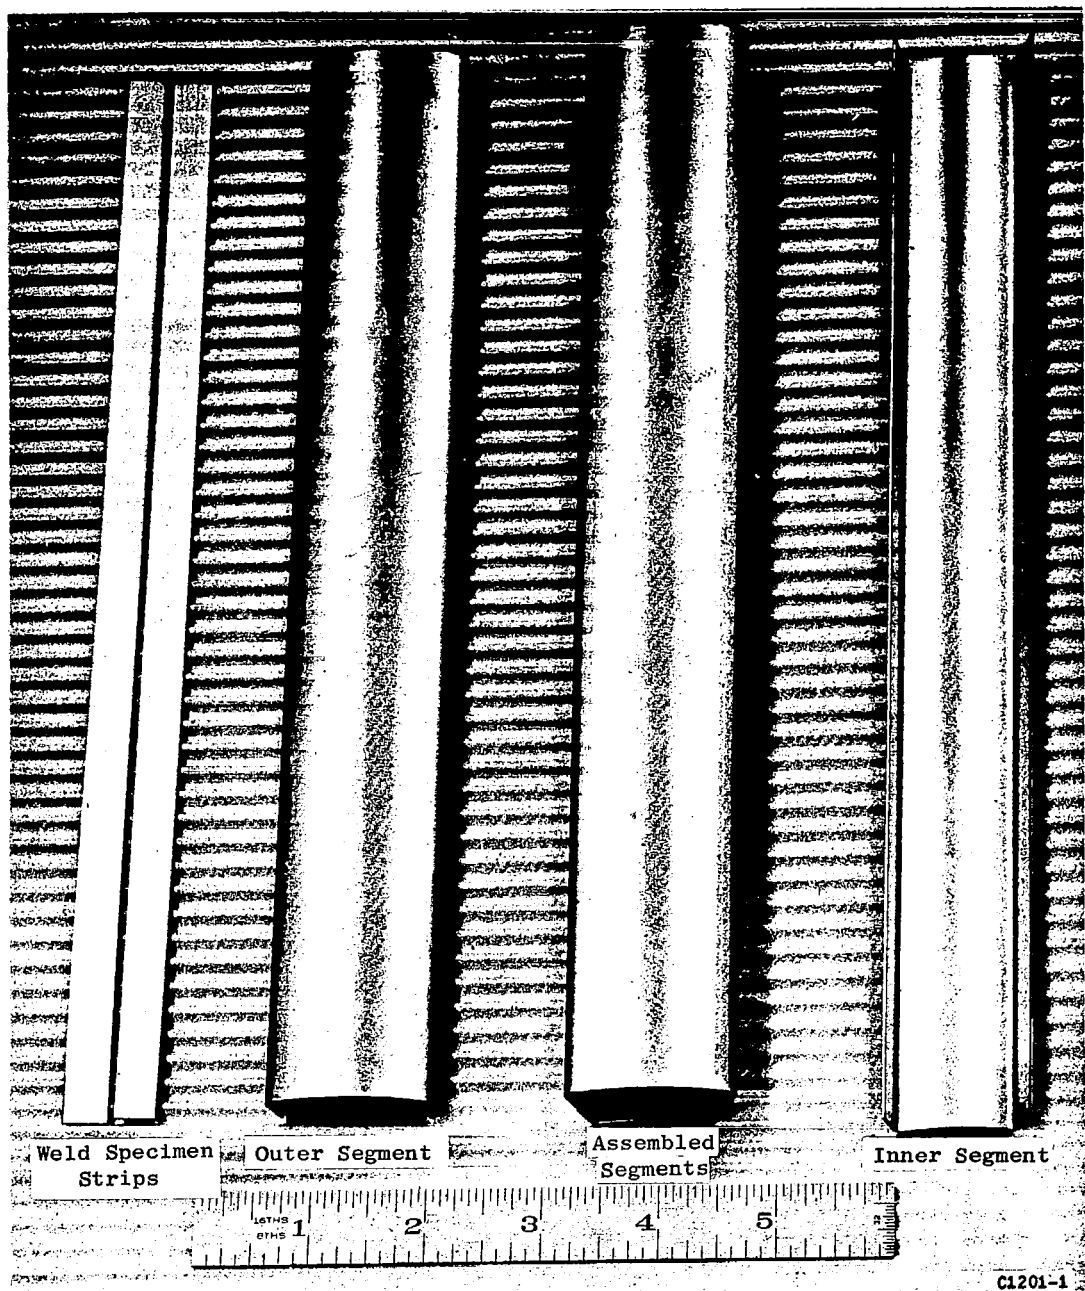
Lithium Fluoride 40° Ring Sector Capsule Segments and Weld Specimen Blank Before Welding. (Orig. C67021526)
